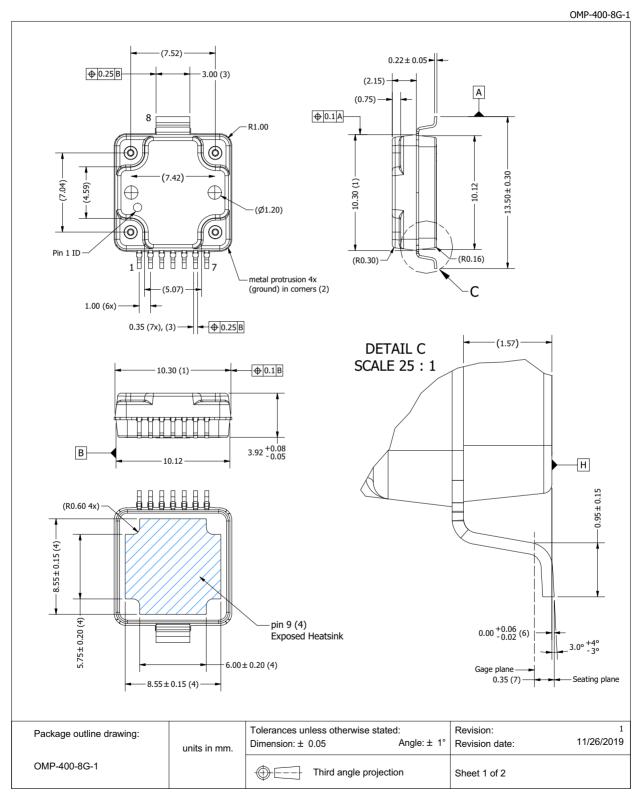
Package outline OMP-400-8G-1 (sheet 1 of 2)
